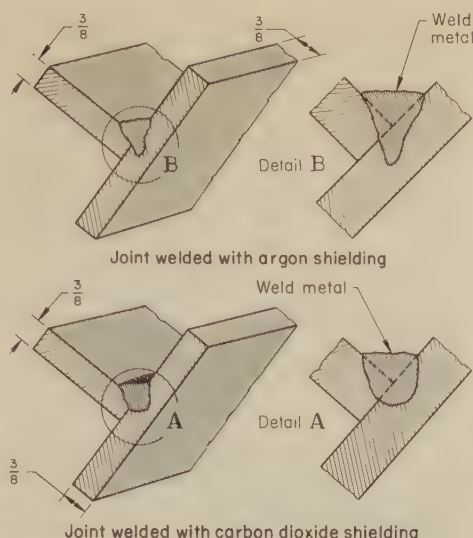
Patterns of penetration obtained using argon shielding and carbon dioxide shielding in flat-position fillet welding under otherwise identical conditions
